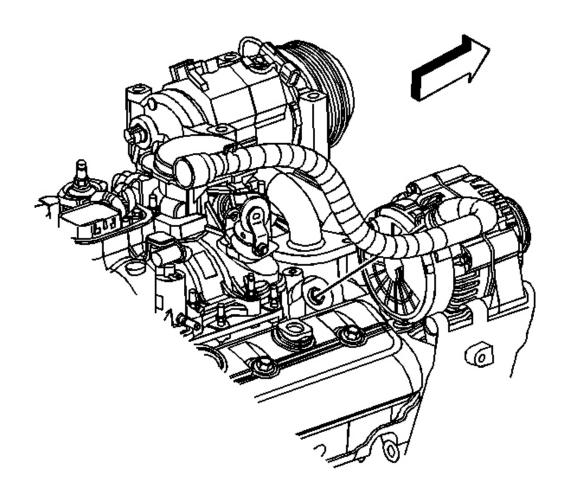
Heater Inlet Hose At Water Pump Courtesy of GENERAL MOTORS CORP.
